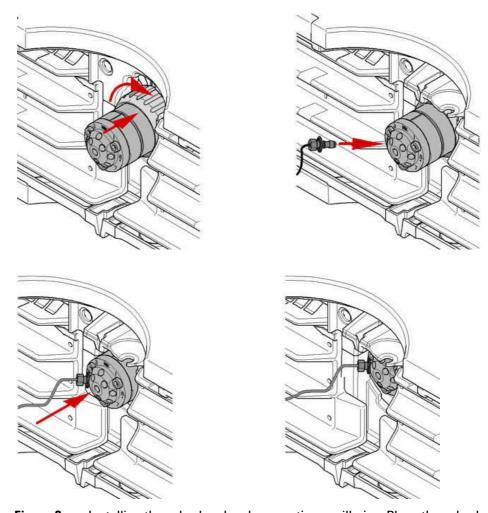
Installing the valve head and connecting capillaries. Place the valve head on the valve drive thread – be sure that the guiding pin of the valve head snaps into the groove of the thread. Fasten the nut manually. Install all capillaries and finally push the valve into its inner position.
